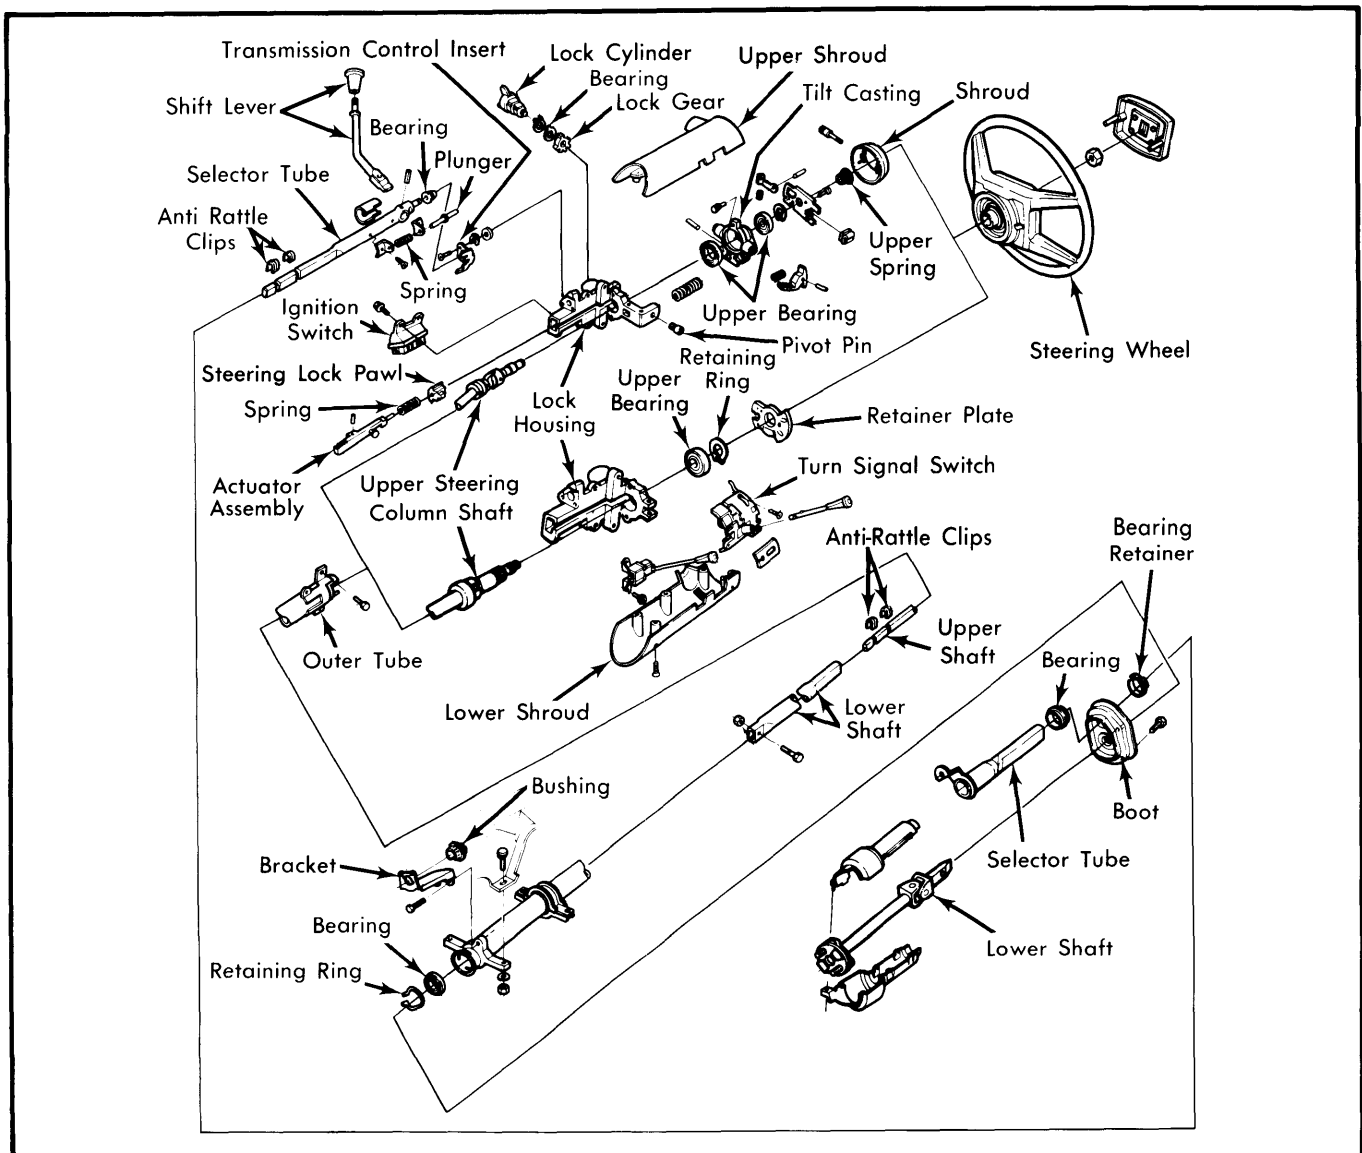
Exploded View of Ford Motor Co. Modular Steering Column
